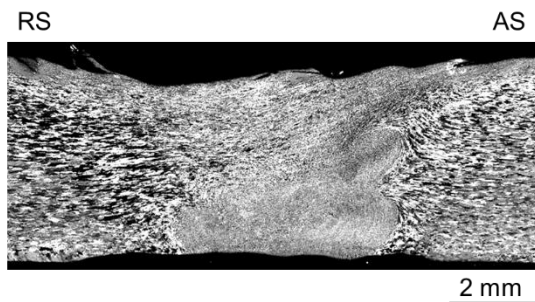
Macrostructure of welded joint with A2024 build-up material.
